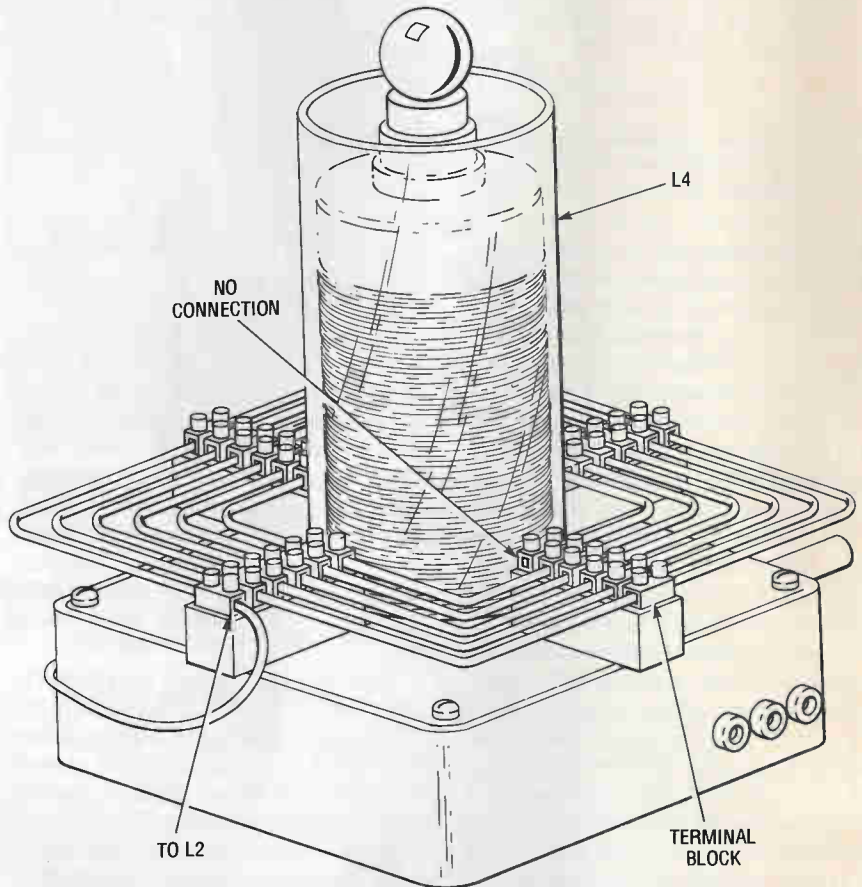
The inner winding of L3 should have an area of about 6-inches square. When making the coil be careful that you do not form wire loops, instead of the continuous coil illustrated here.
